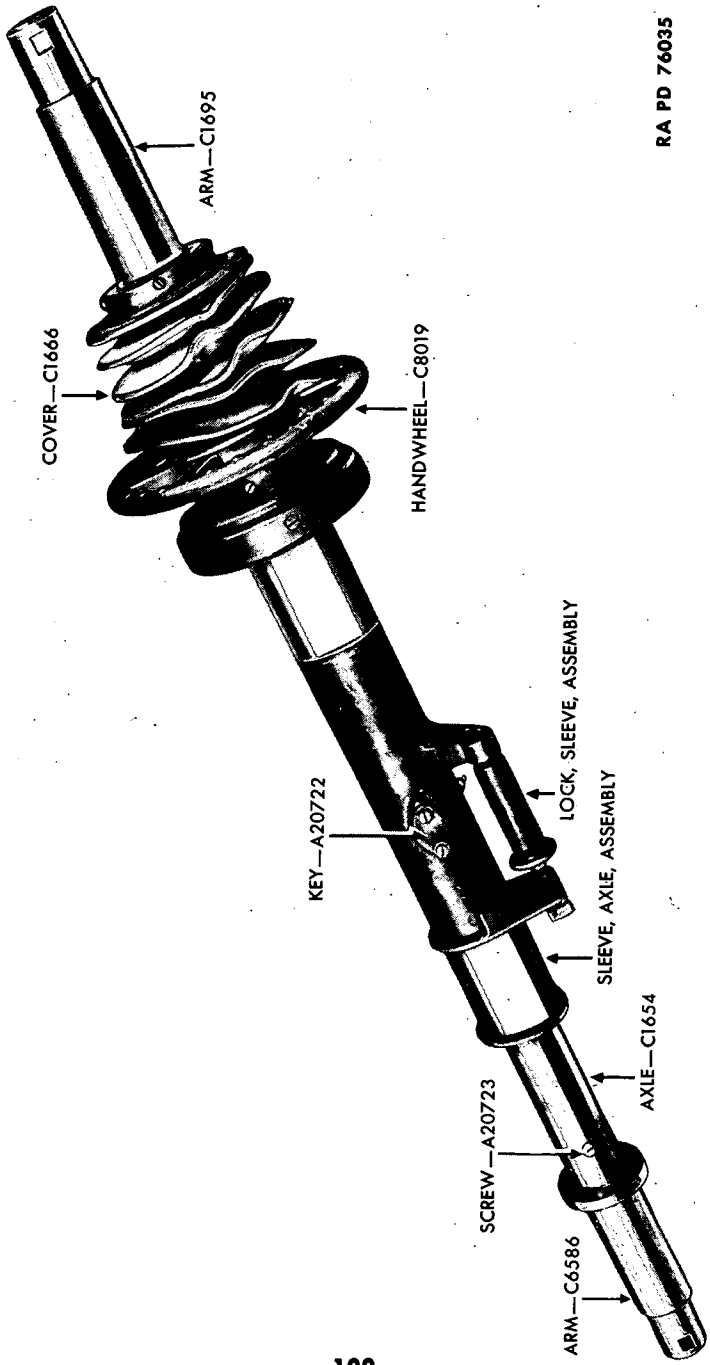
Axle and Traversing Mechanism Assembly—M1 and M8 Carriages
